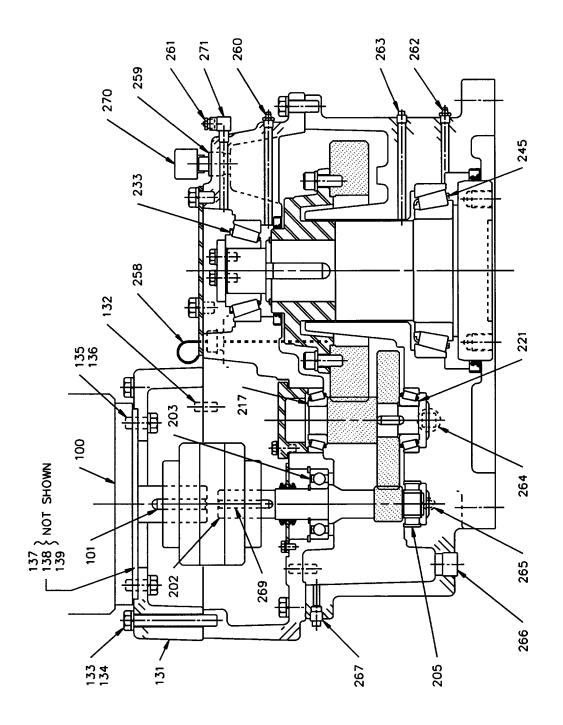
GT Double Reduction Gear Drive, Size 1,2,3,4
